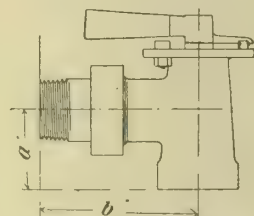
DIAGRAM OF VALVE DIMENSIONS
